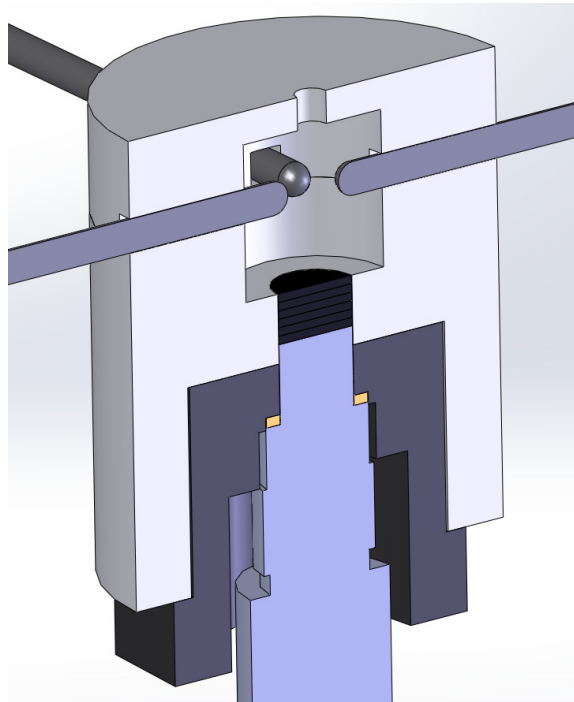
Drawing of the metal insert used to mate the SparkJet Macor housing to the PCB pressure transducer.
